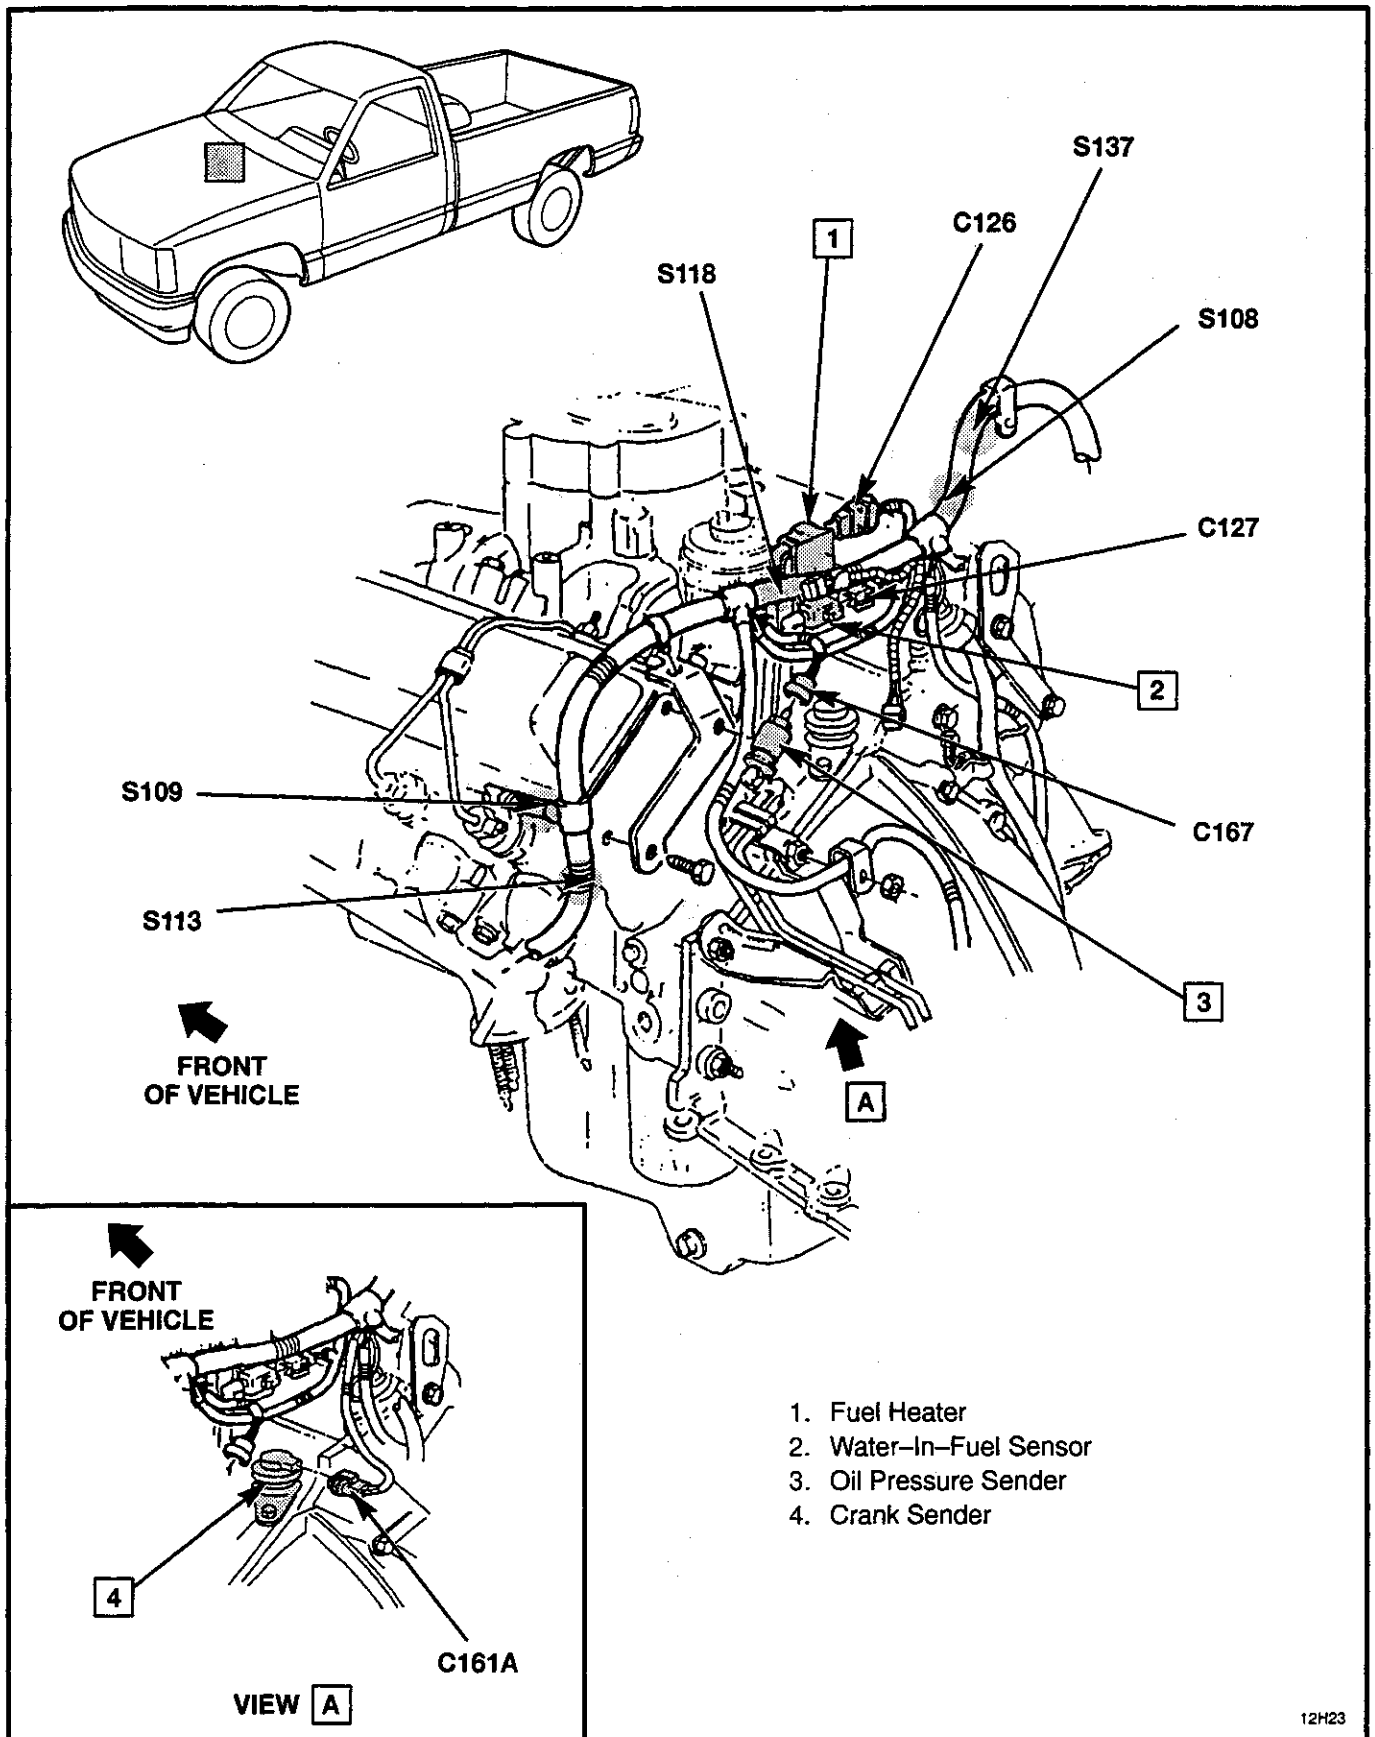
6.5L Diesel Engine Wiring, Rear
